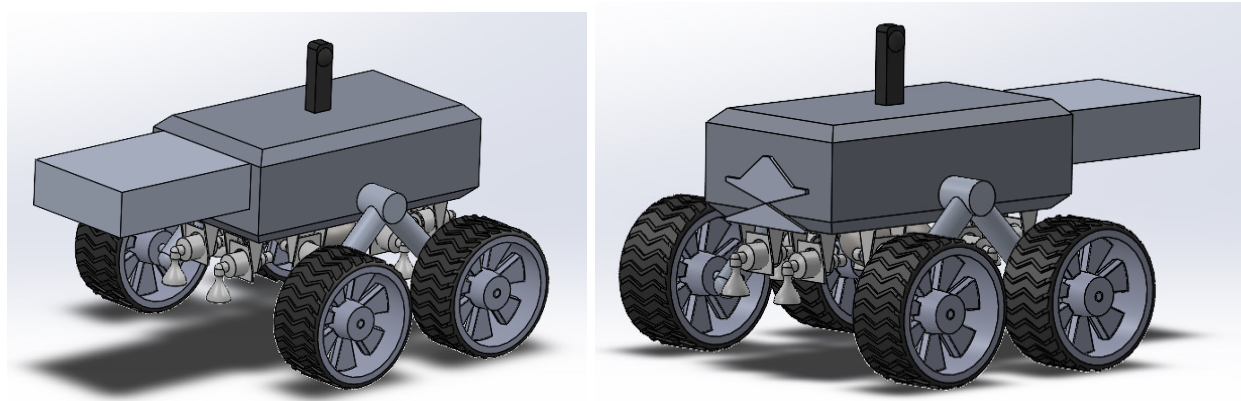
Vehicle Assembly Model CAD (repeated)
